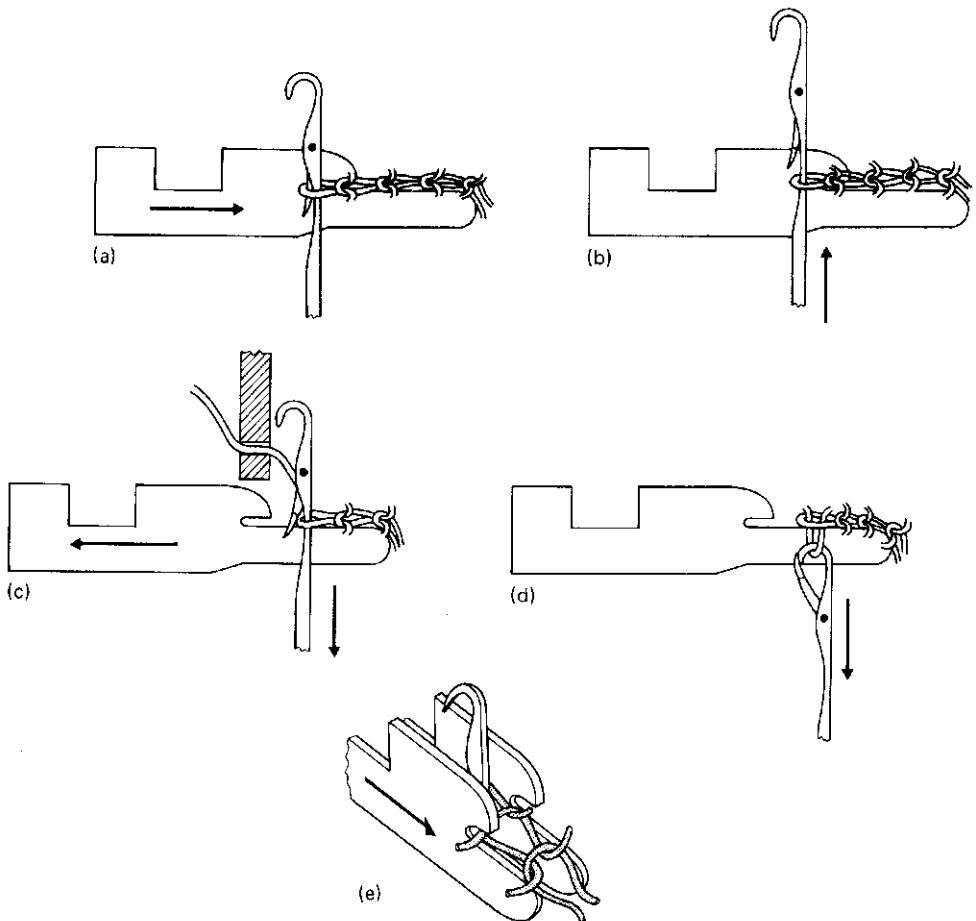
Knitting cycle of a single jersey latch needle machine.
